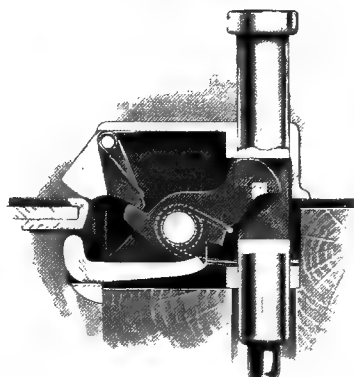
Section of Design H, Trap Door Lock, in Normal Position, With Door Locker Down.
